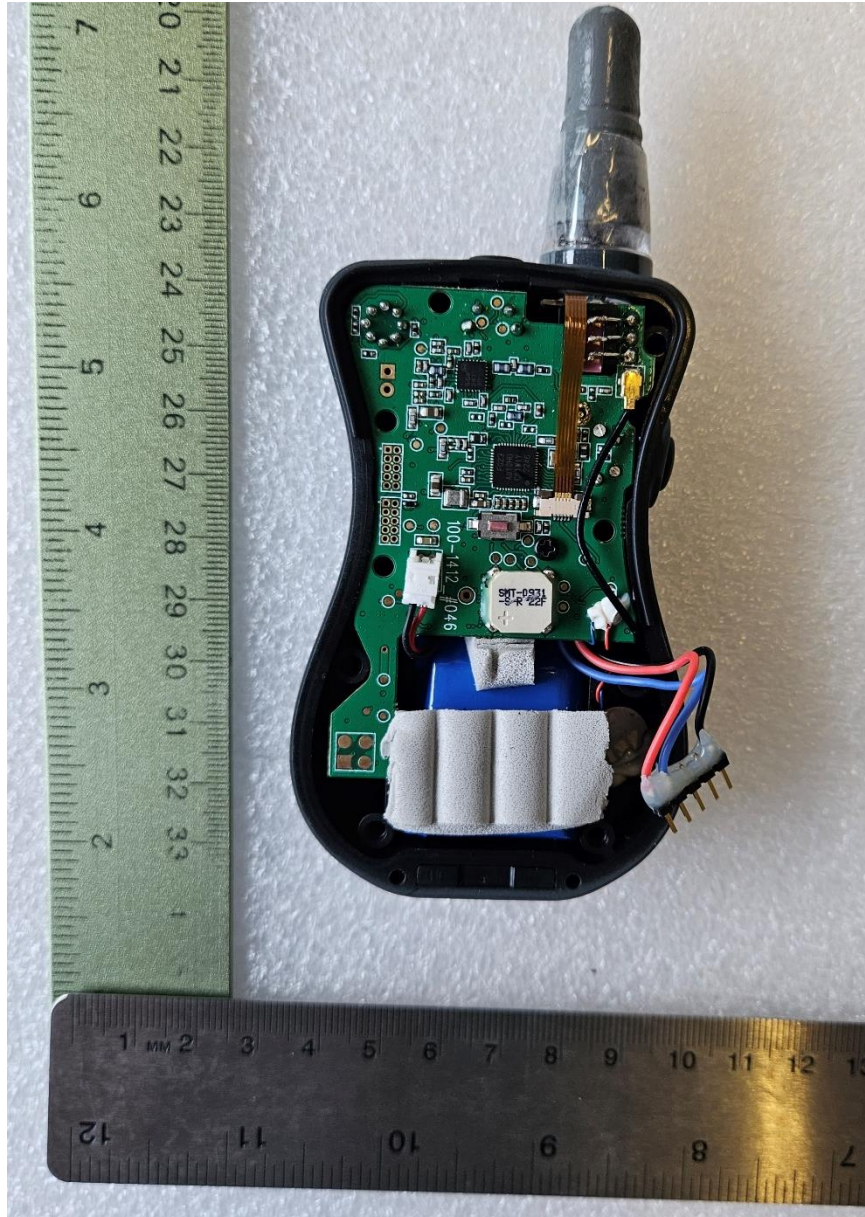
Main PCB Front, Half-Mile (300-34451-1)
